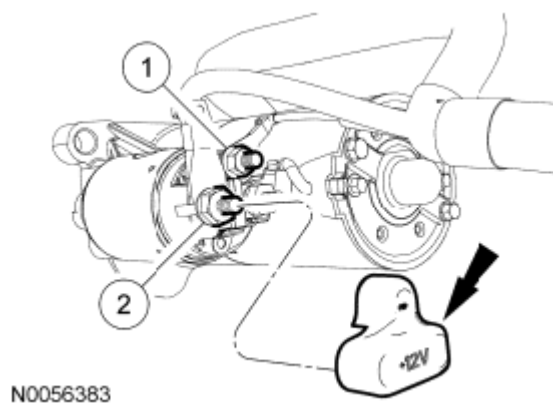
Locating Terminal Cover, Starter Wiring And Nuts
